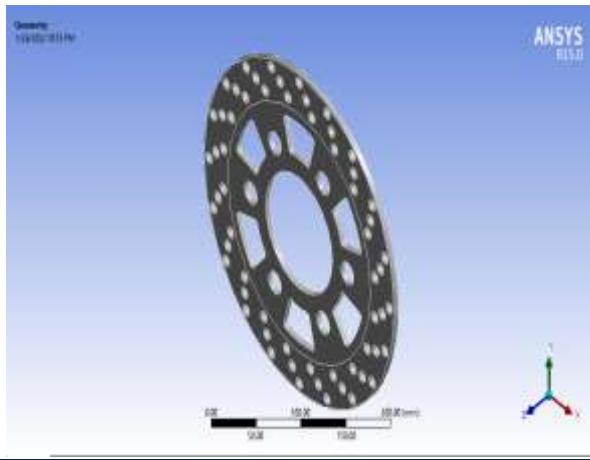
(a) Geometry of the Disc Brake Rotor.
